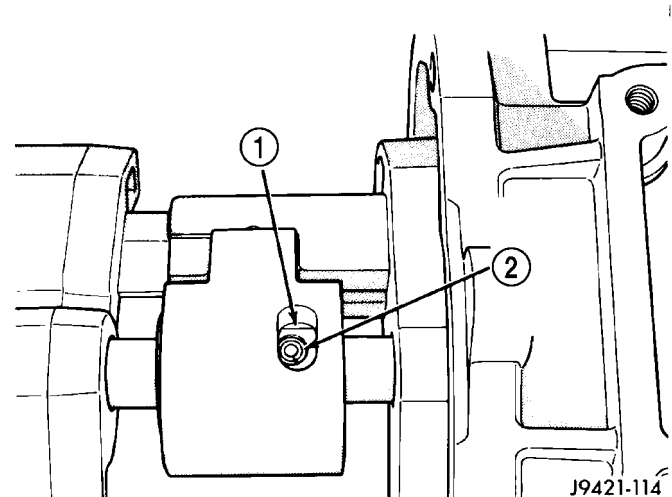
SEATING SHIFT SHAFT LEVER ROLL PIN
